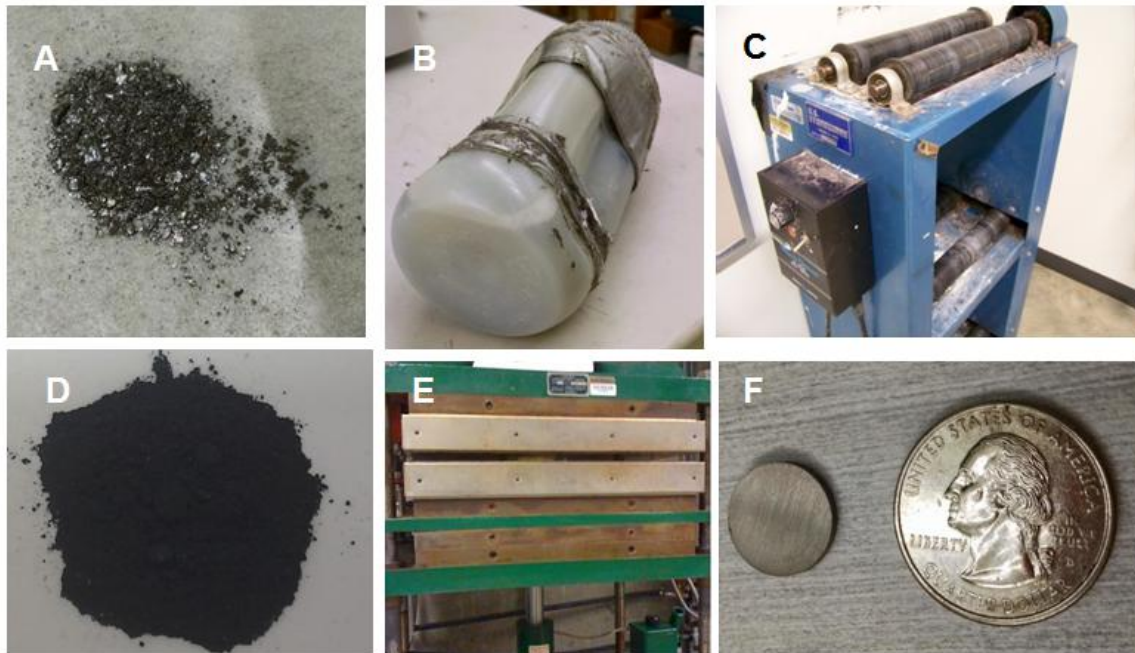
milling process showing starting materials (A), dented milling jar (B), ball mill machine (C), milled powder (D), hot press (E), and the final pellet shown next to an American quarter (F).
